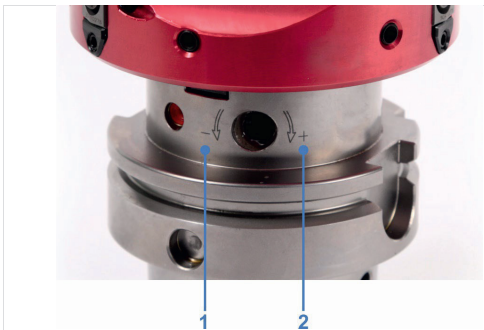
Indication of the direction of rotation for clamping and unclamping the tool
